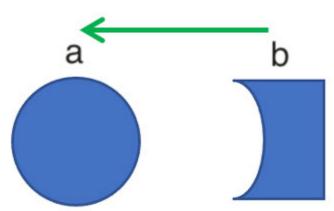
Orientation of the O-rings. (a) Main O-ring. (b) Backup O-ring.
